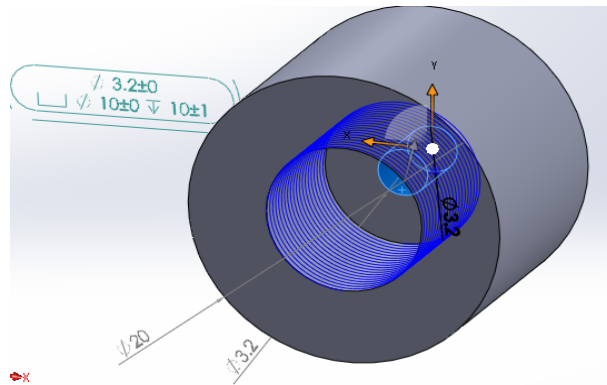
3-D design of the Squeezing part to hold the connector on the sample probe and air seal to avoid any air going through the tube.
